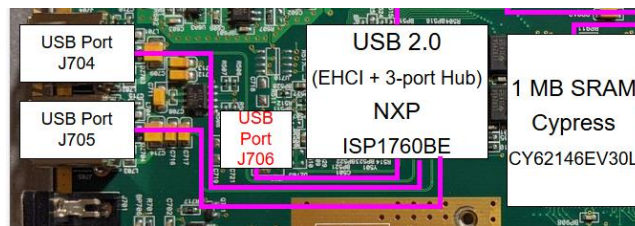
Example assembly drawing / block diagram with logical blocks aligned to physical components.
